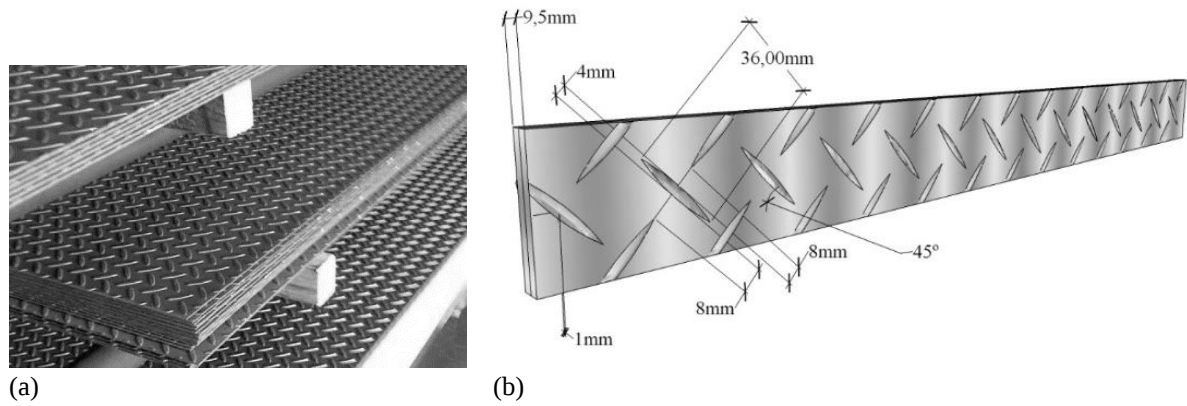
(a). Chess type plate; (b). Linear connector formed by chess type plate welded “back-to-back”
